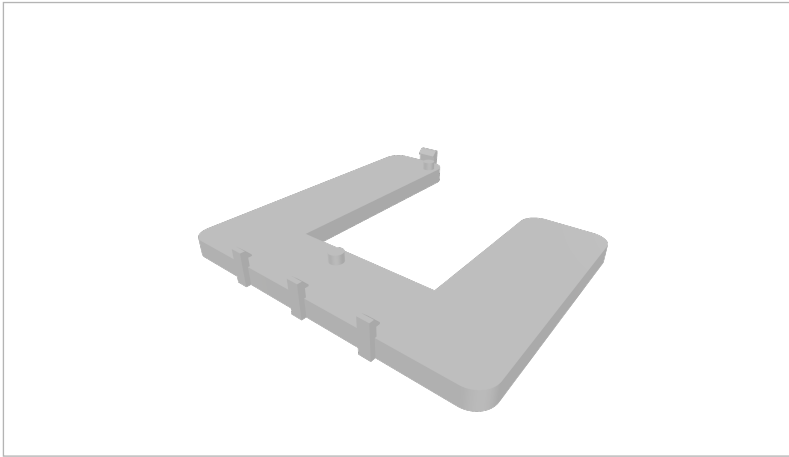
XE121 Mount baseplate. Dimensions: 68×67 mm.
